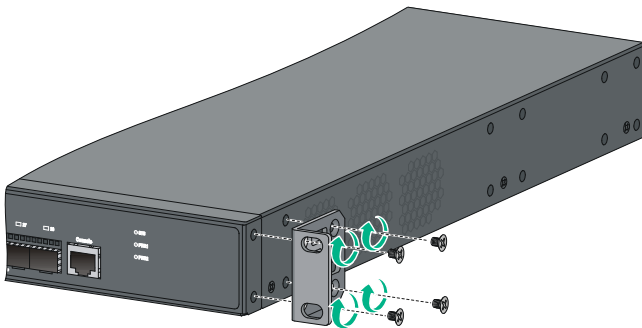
Attaching a four-hole mounting bracket to the rear mounting position on an HPE 5130 24G SFP 4SFP+ EI switch
